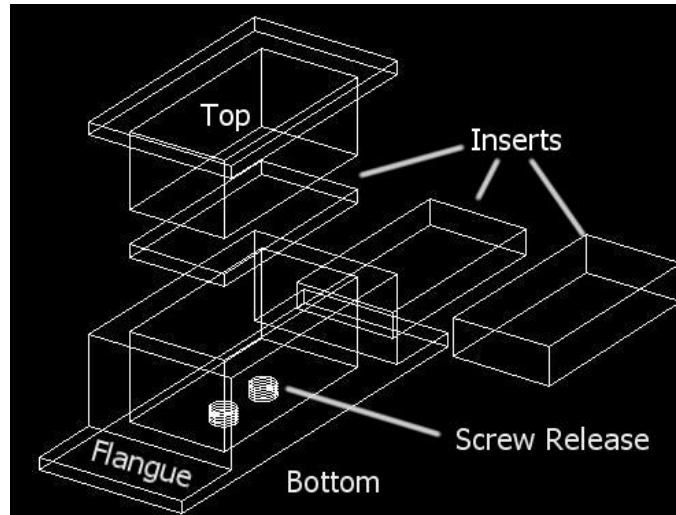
Three dimensional drawing of mould 2 (*AutoCad*)
